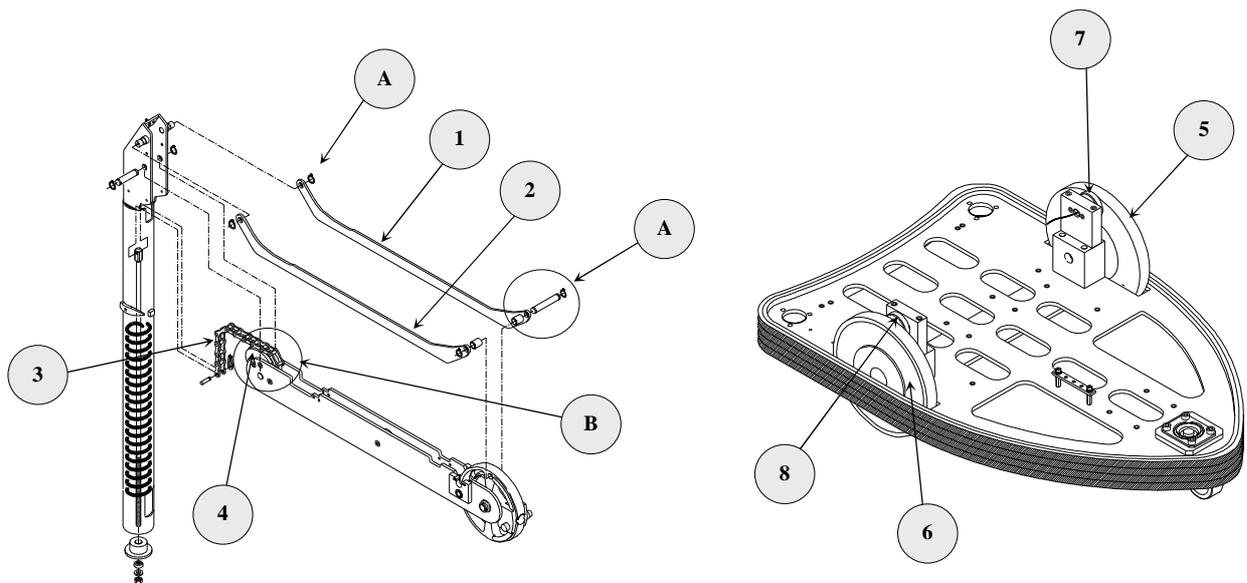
SHAFT WITH ARM – BASE WHEELS
